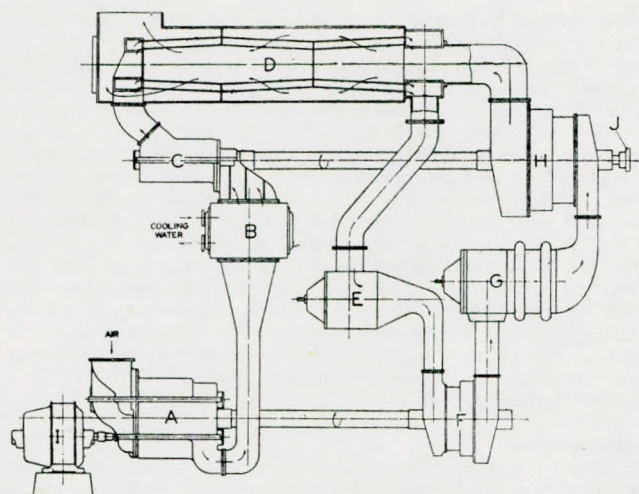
Layout of the 2,500 h.p. turbine installation.
